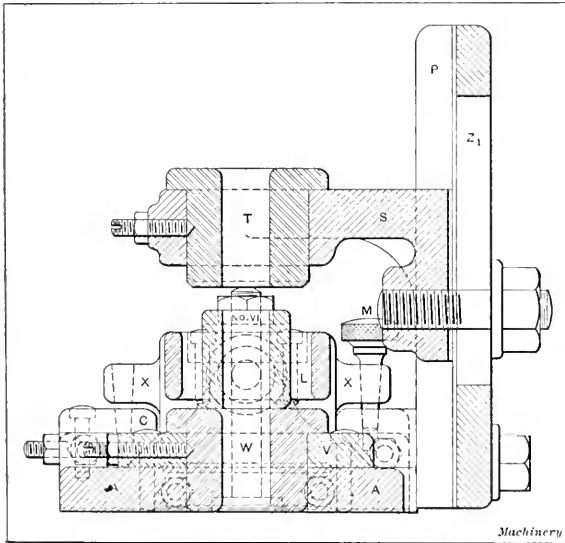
Cross-sectional View of the Universal Drill Jig on Line c-d
